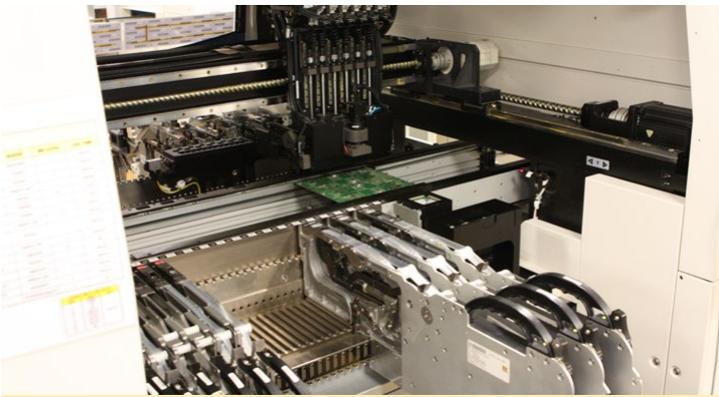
The Surface Mount Technology (SMT) machine mounts devices on the PCB
